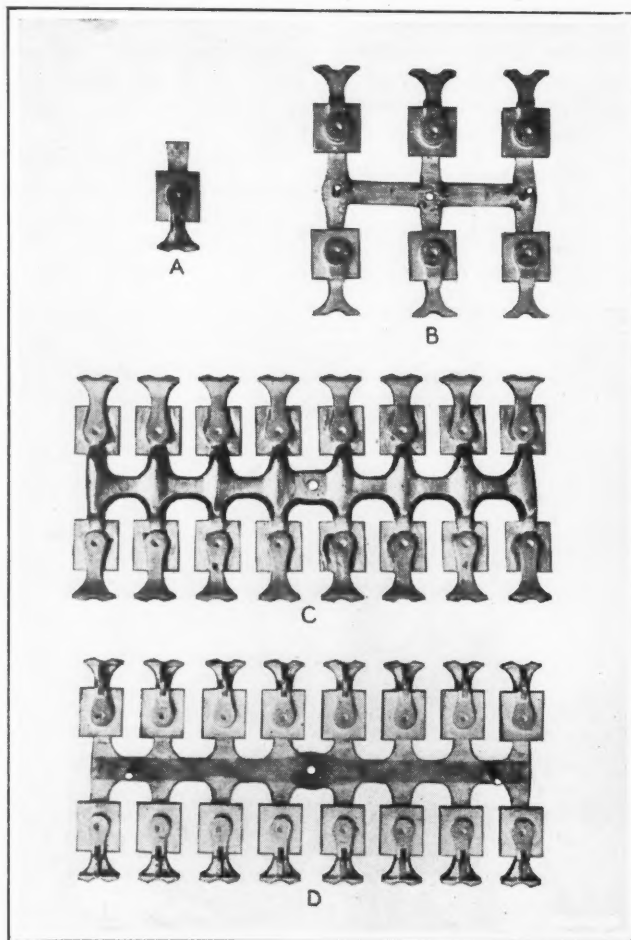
(A) Master Pattern; (B) Gate of Six White Metal Patterns used in making Pattern Units; (C) and (D) Gate of Patterns used in making Double-faced Match Plate Patterns
